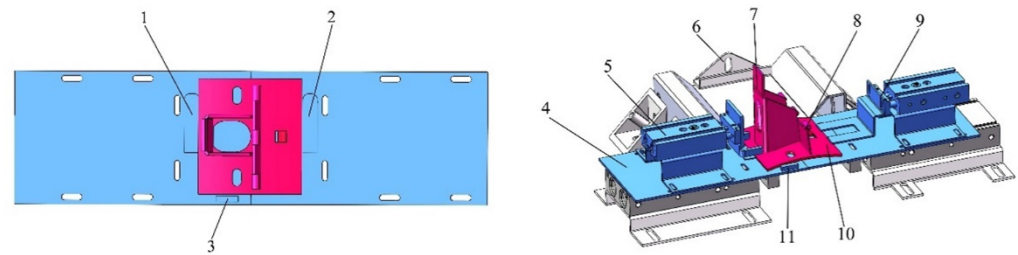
Structure diagram of welding fixture. 1. Limit block; 2. limit block; 3. limit block; 4. welding workbench; 5. static duckbill clamping device; 6. girdle push plate; 7. static duckbill; 8. hinge; 9. hinge clamping device; 10. girdle; 11. limit block.
